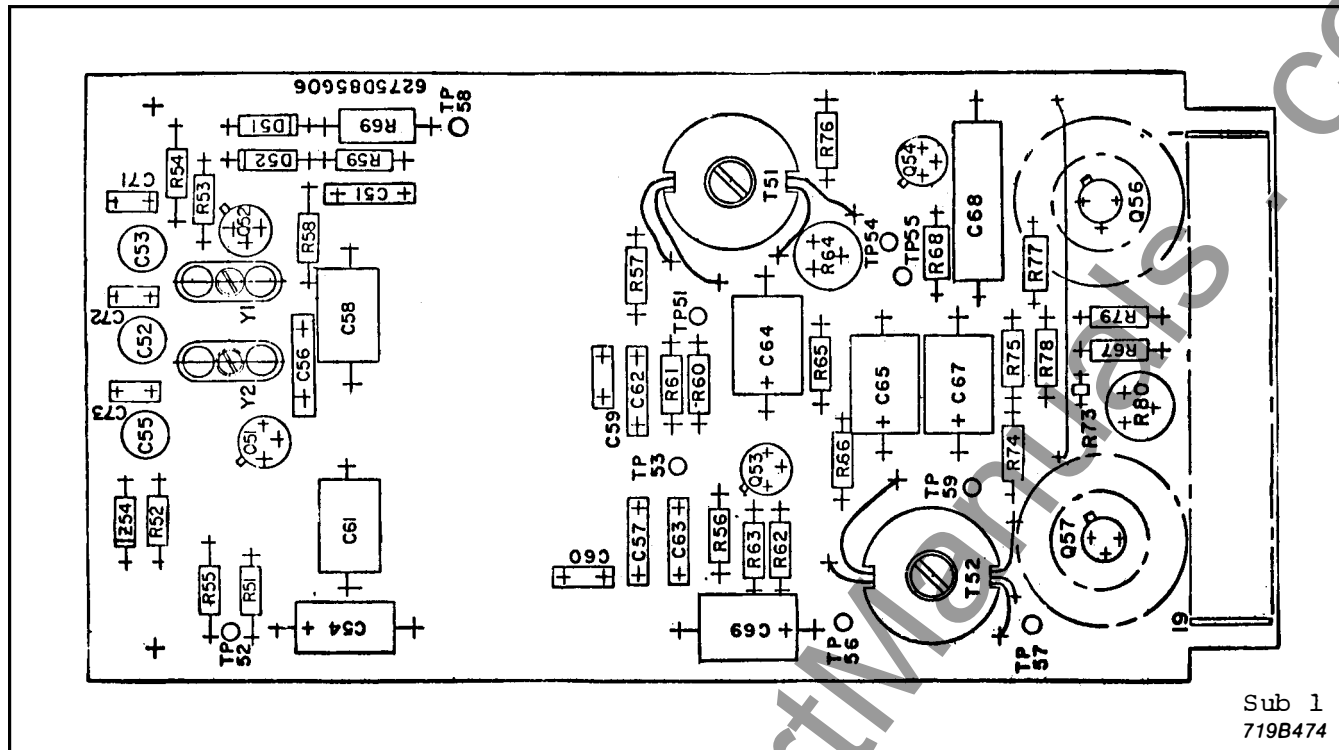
Component Locations on the Transmitter Printed Circuit Board. Style 6275D85G06
